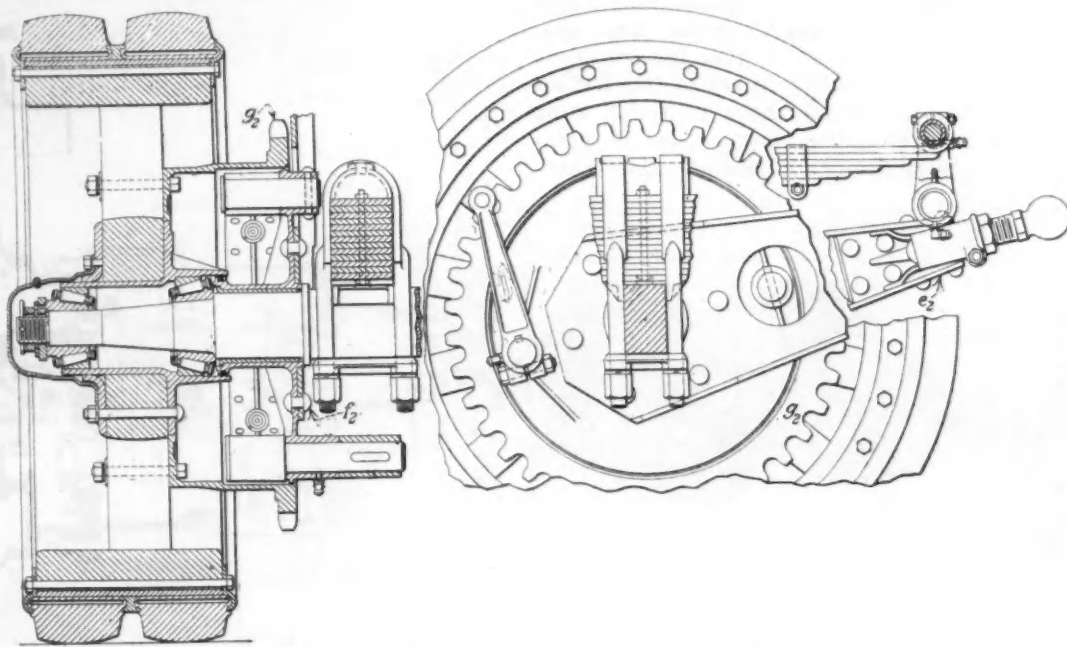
CROSS-SECTION AND SIDE ELEVATION SHOWING THE LOCATION OF THE EMERGENCY BRAKES IN THE REAR WHEELS
